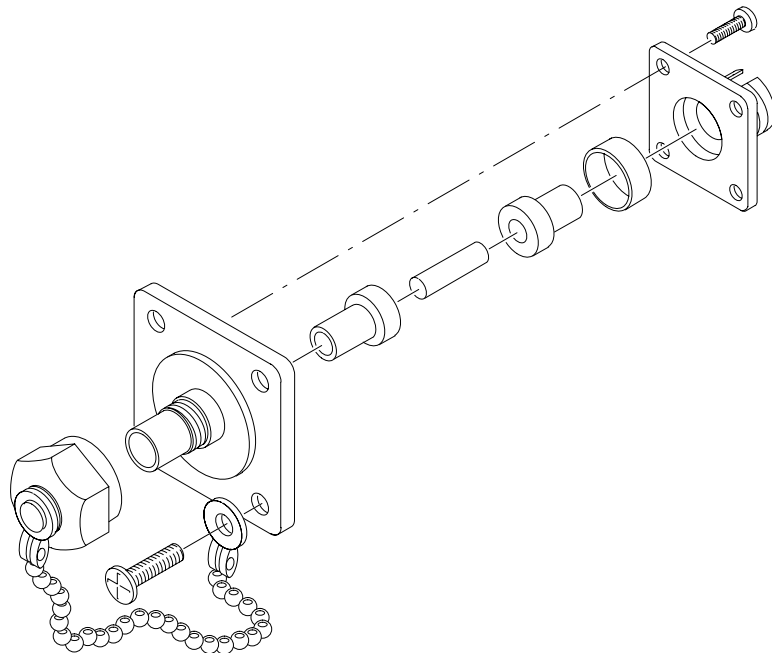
DIN 47256 Optical Bulkhead Assembly
